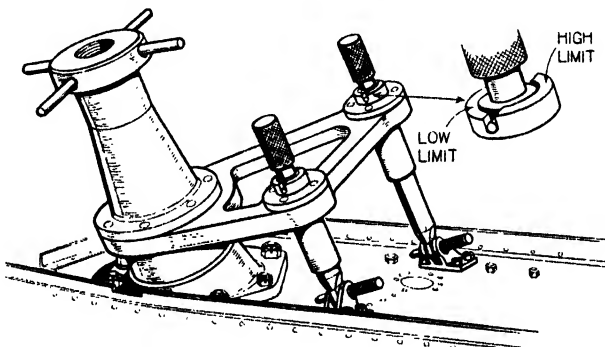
Details of the special gauging fixture used to check the alignment of the undercarriage locking-pin fittings on the spar from the pintle.
